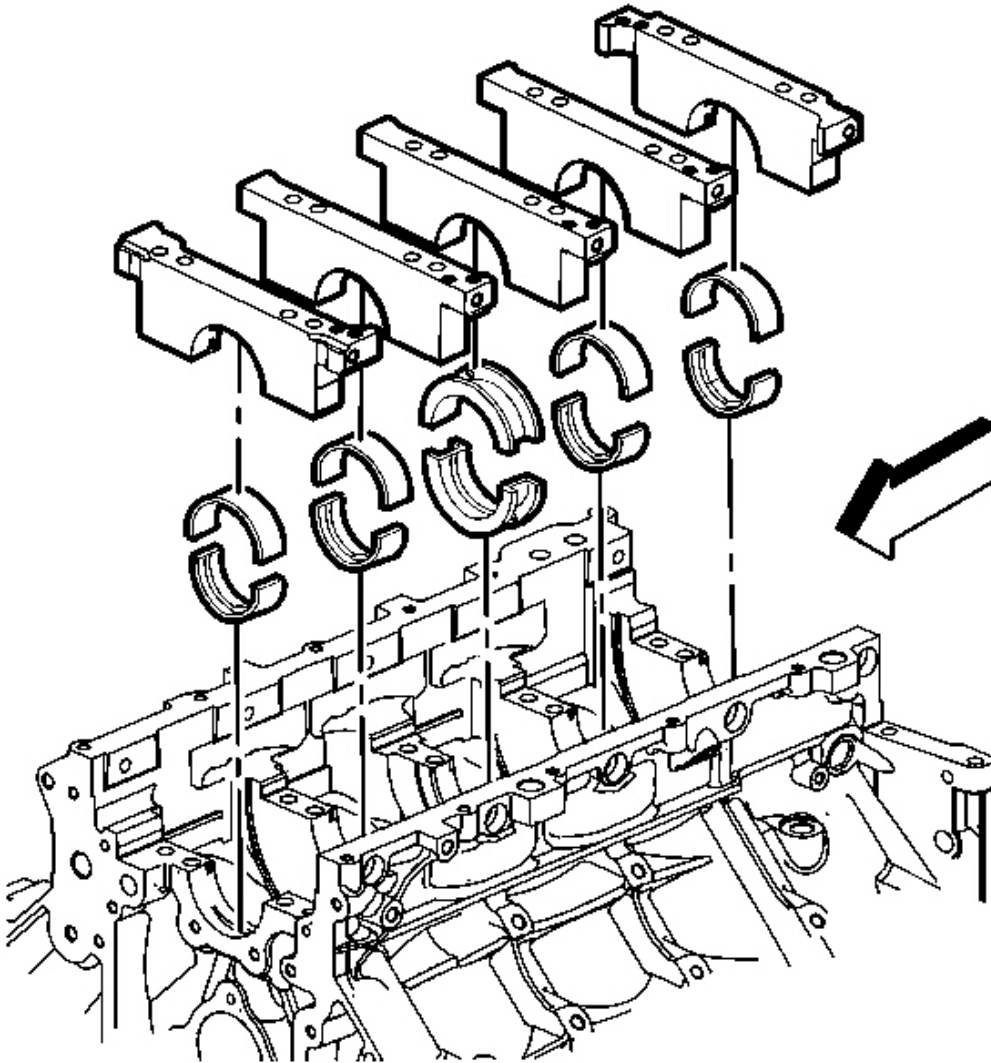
View Of Crankshaft Bearings & Bearing Caps
